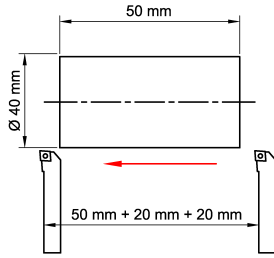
Sketch with workpiece and cutting tool of the simulated single longitudinal turning process
